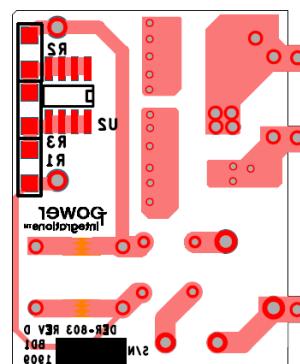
Motherboard Printed Circuit Layout, Bottom.
